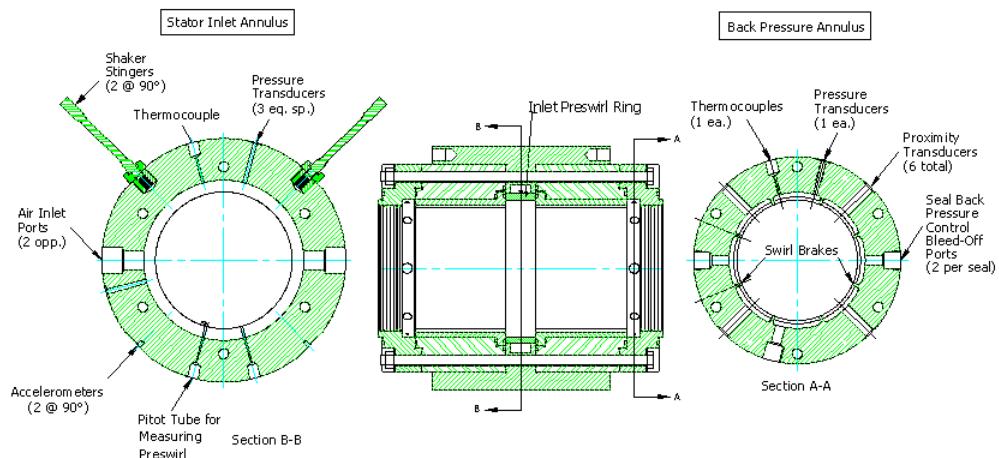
shows a cross section view of the test rig. The rotor is supported on hydrostatic bearings. The hydrostatic support bearings are supplied with water at 69 bar-a (1000 psi-a). The test rotor has a diameter of 114.3 mm (4.500 in). These dimensions result in a rotor-to-seal radial clearance of 0.2 mm (8 mils) for the seals tested here.
